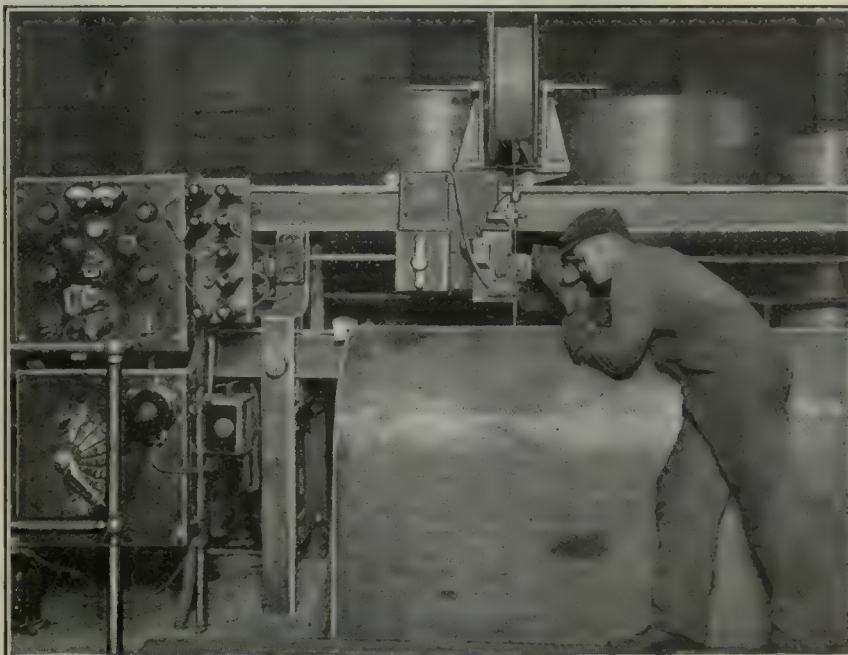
AUTOMATIC WELDER CLOSING SIDE SEAMS ON LARGE TANKS
